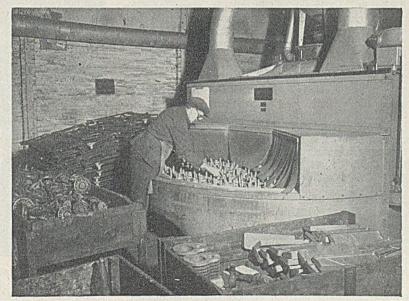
Newly Installed Guttman "Whirlblaster" Shot-blast Plant. Note the Use of Stillages for holding both Raw and Treated Castings.
